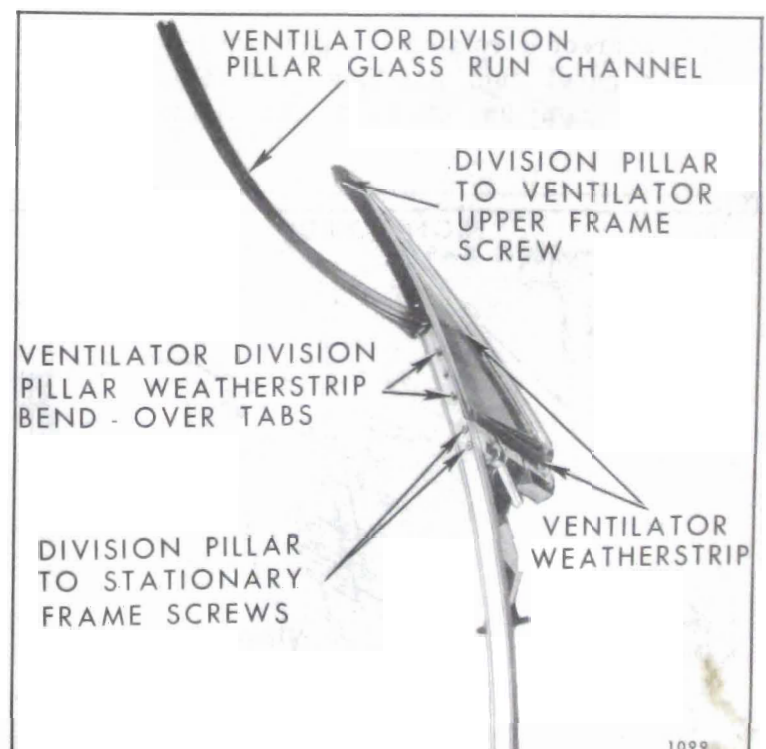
Rear Door Ventilator Assembly - 68069-68169 Styles
